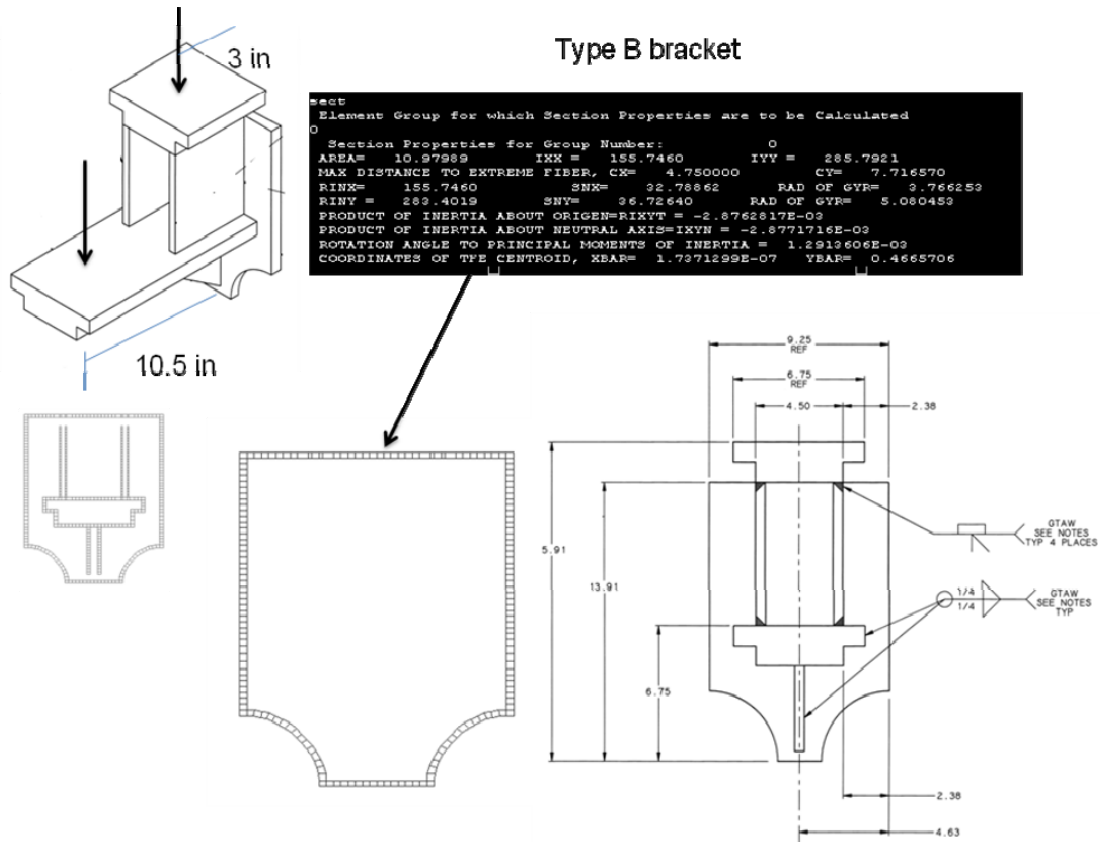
Weld Section Properties for the Type B Bracket
